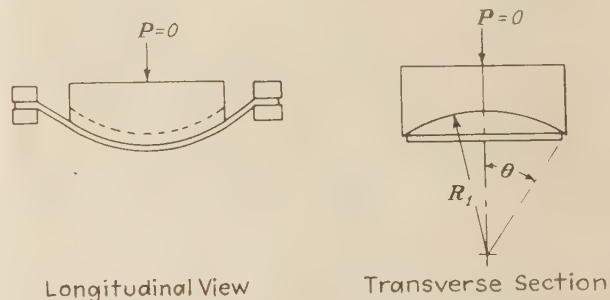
FORMING OF SADDLEBACK PART FROM SAGGING SHEET
